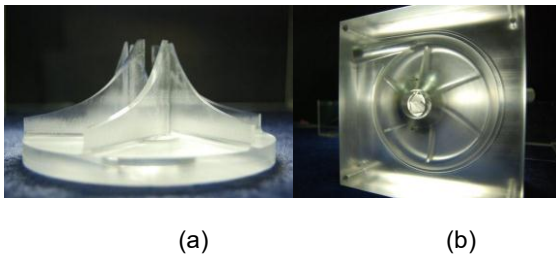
The 2X scale-up model: (a) impeller, (b) assembly of the impeller and the pump casing.
